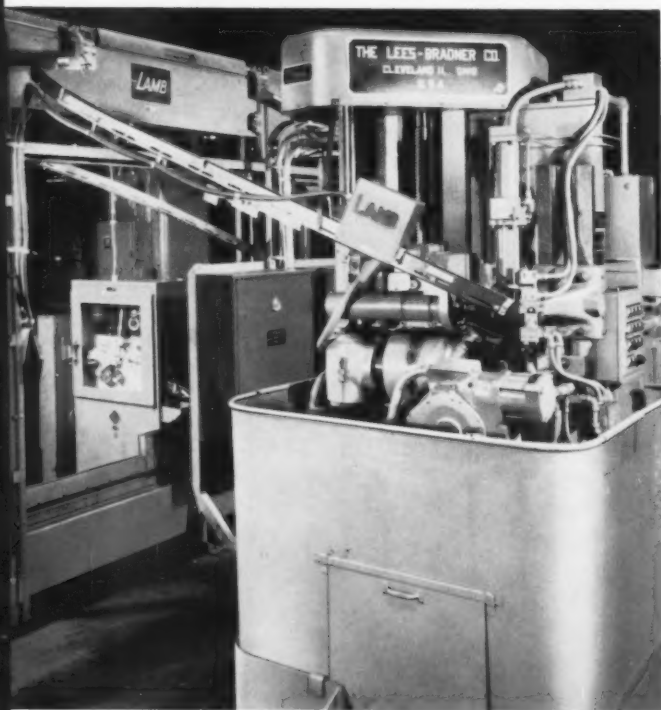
The blade is twisted, drilled, cut off, and broached; then the crank is pressed in and the assembly is ejected—all automatically.
